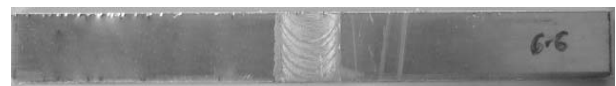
Photo of a fatigue specimen cut from welded plate before edges machining.
